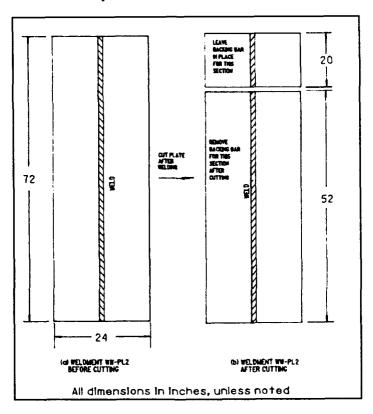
Wet Welded Fatigue Test Plate WW-PL2 After Cutting
